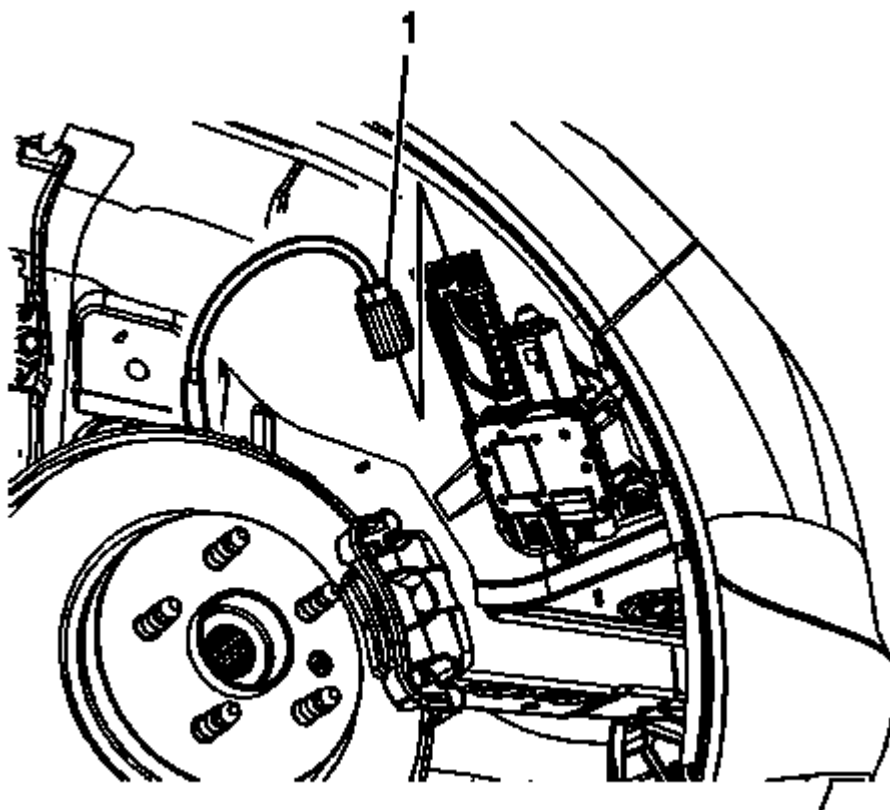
Rear Parking Brake Cable Nut And Electronic Parking Brake Control Module
